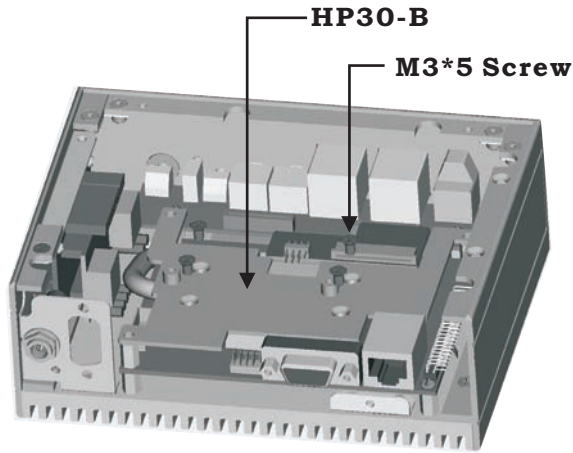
Unfix 4pcs M3*5 sunk screws, and take off HP 30-A and HP 30-B.
